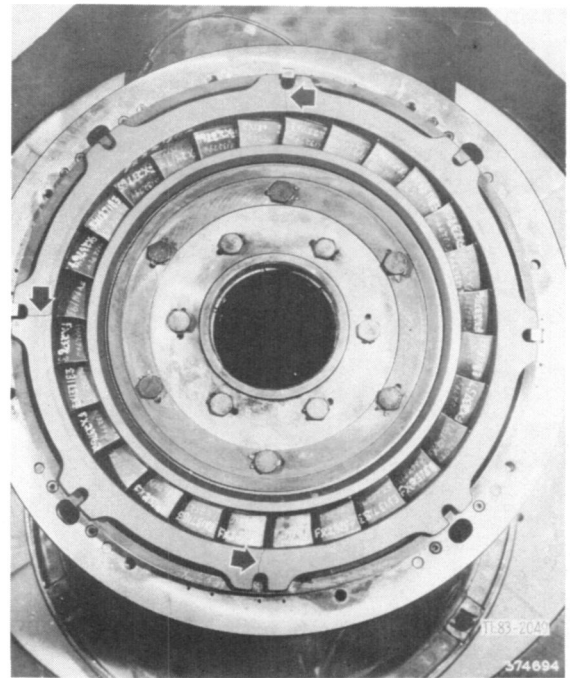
View of 2070°F-configuration gasifier nozzle assembly from rear, showing cracks in outer and inner vane support rings after testing in BU13 of the thermal shock rig.
